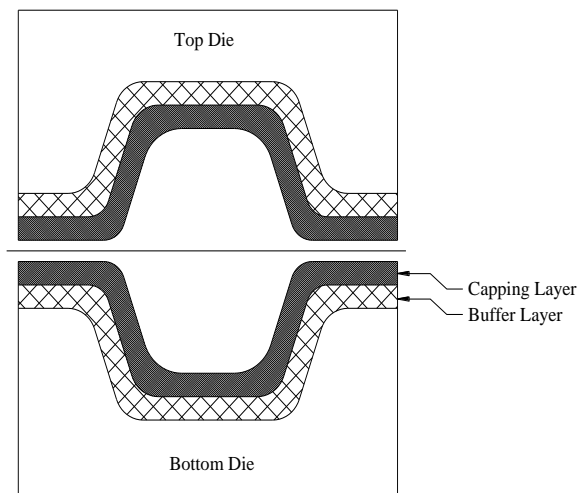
A schematic cross-section of multi-layered flood-welded forging die showing capping and buffer layers.
